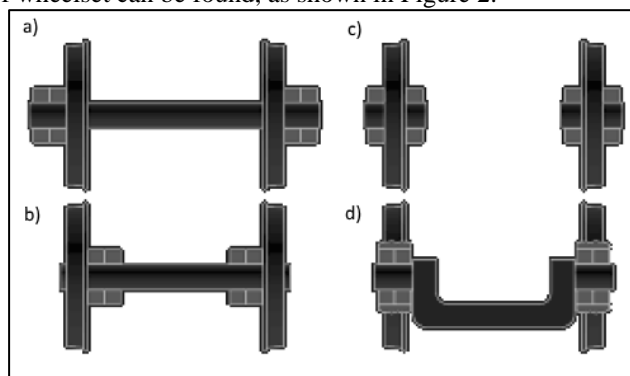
Different kinds of wheelsets [5] a) with outboard bearings; b) with inboard bearings; c) independently rotating wheels with bearings on both sides; d) independently rotating wheels with no-rotating axlebridge.
